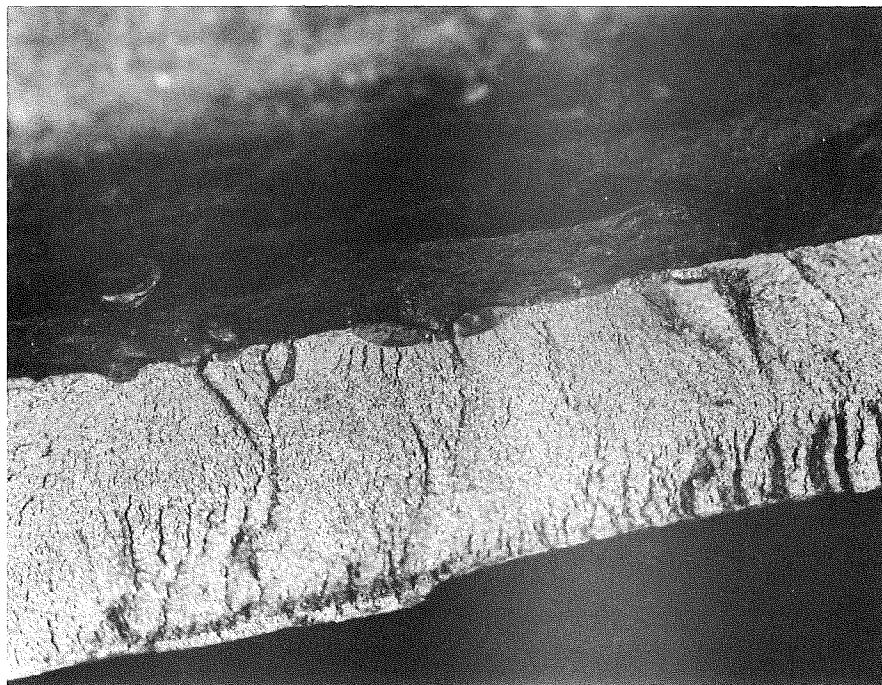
Crack Development Along Transverse Weld Toe
